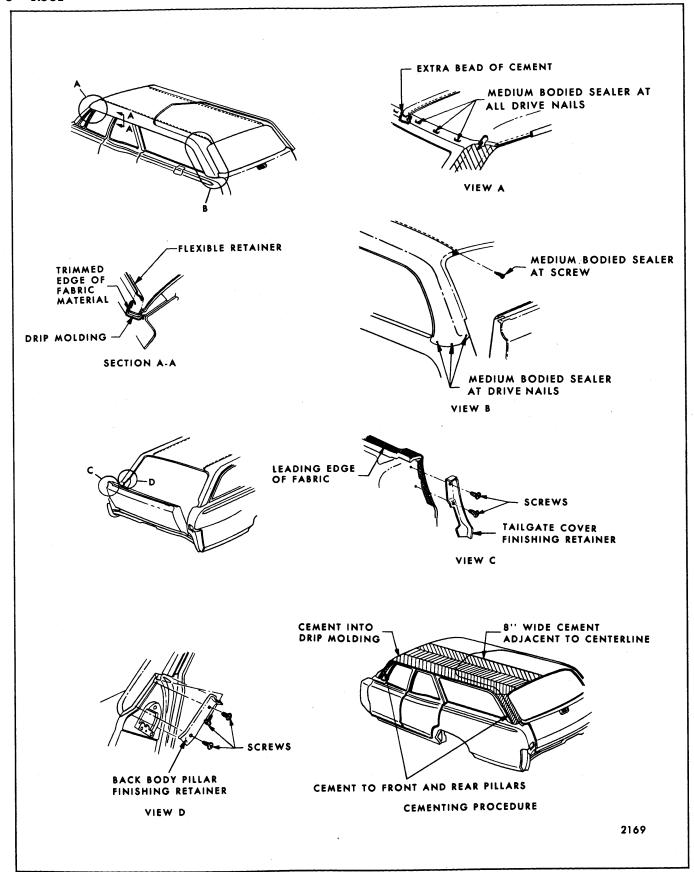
Fabric Roof Cover Installation - Station Wagon Styles
